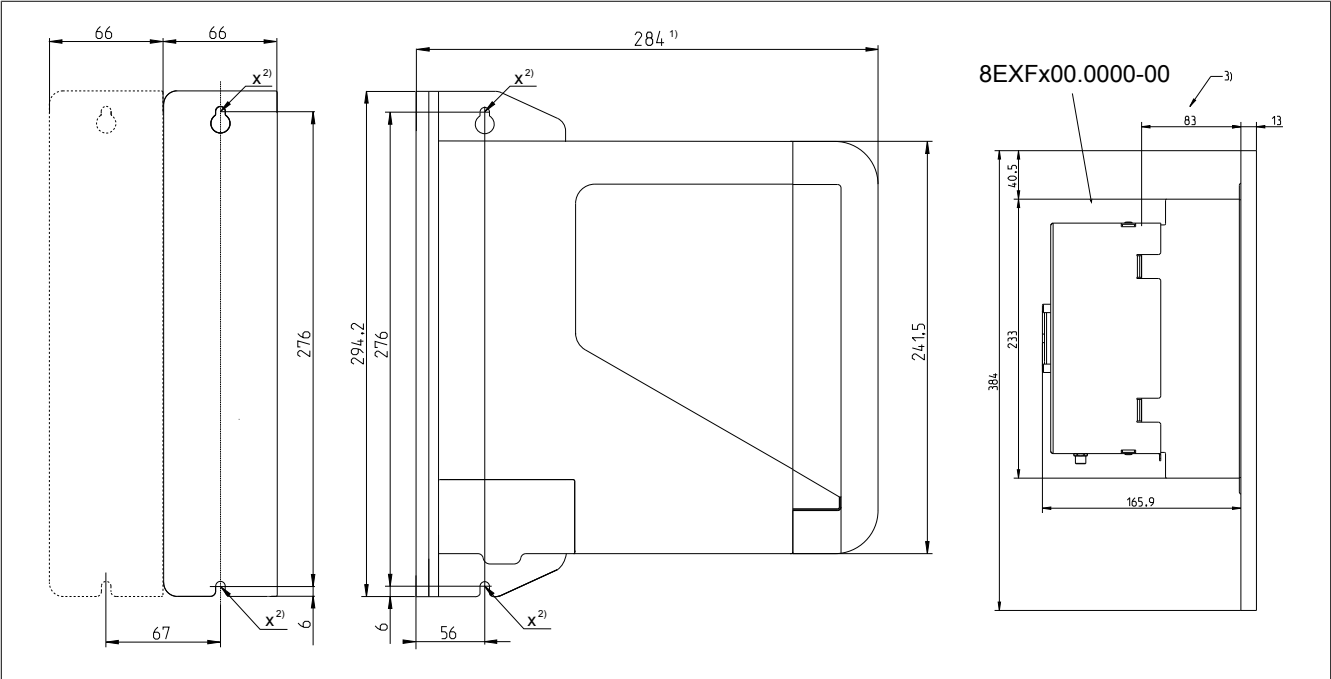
1-axis module cold plate up to 4 kW - Dimension diagram
